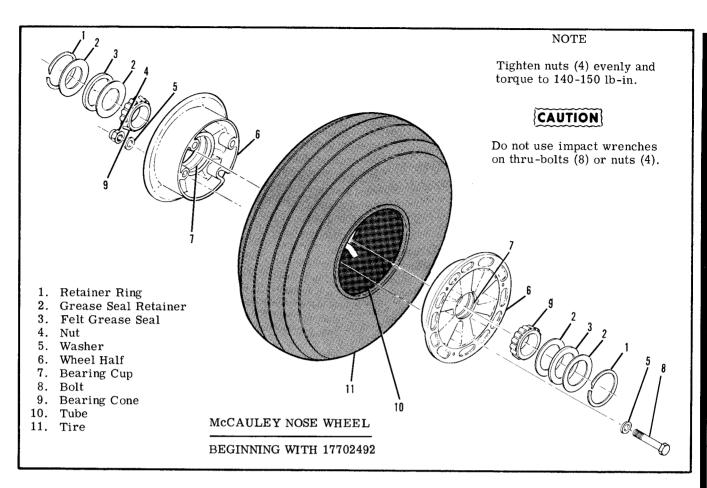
Nose Wheel (Sheet 3 of 3)
